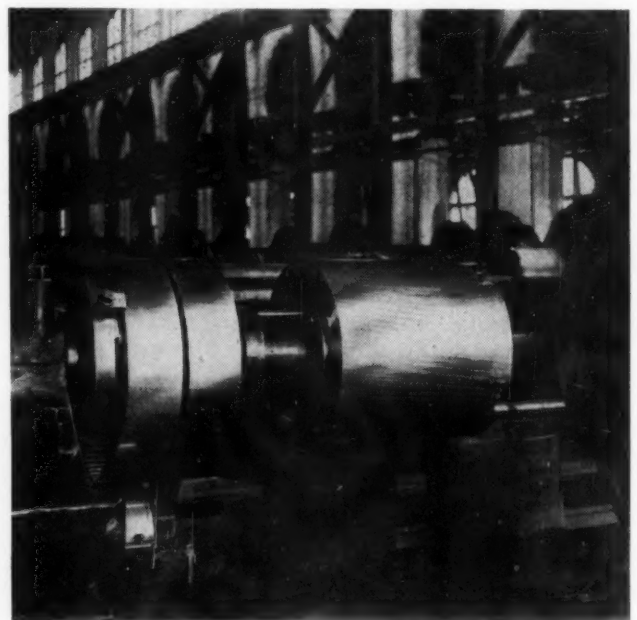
OBSOLETE RIFLING HEAD FOR 16-IN. GUN
